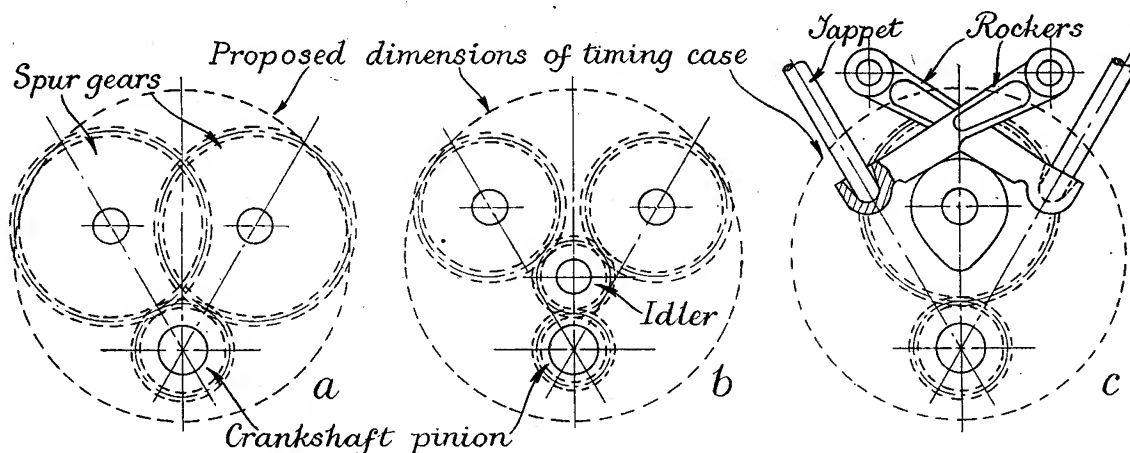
Diagrams illustrating problems in timing gear for vee twin engines: a, showing overlapping of standard size spur gears; b, the use of smaller gears and pinions, with an idler pinion interposed to correct spacing; c, a single camshaft with four cams operating tappets through swinging rockers. Note that in all cases the complete gear exceeds the dimensions of the proposed timing case as shown by dotted lines in Fig. 1.
